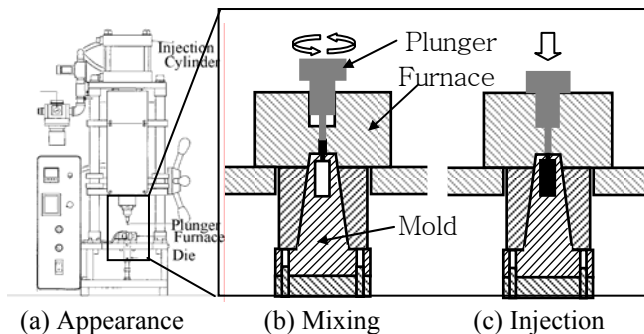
Schematic diagrams of direct mixing-injection moulding machine.
